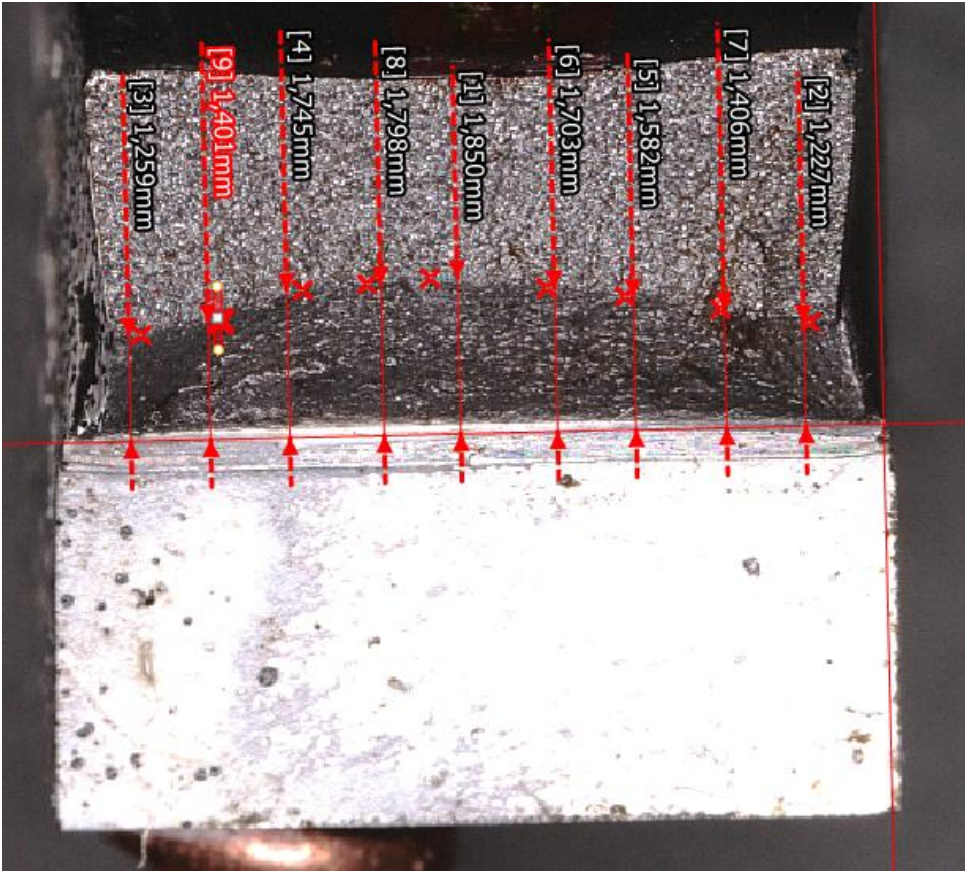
Typical post-test fracture surfaces illustrating crack extension area, with nine-point average estimation using Keyence instrument.
